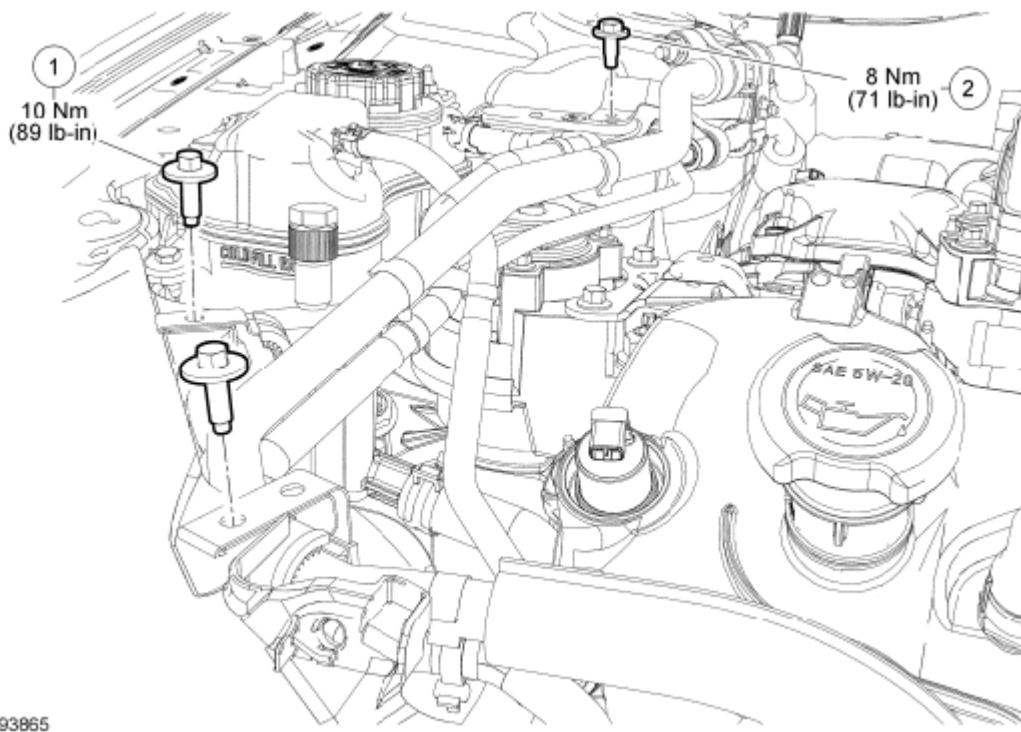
Identifying Engine Mount Components With Torque Specifications (1 Of 3)
